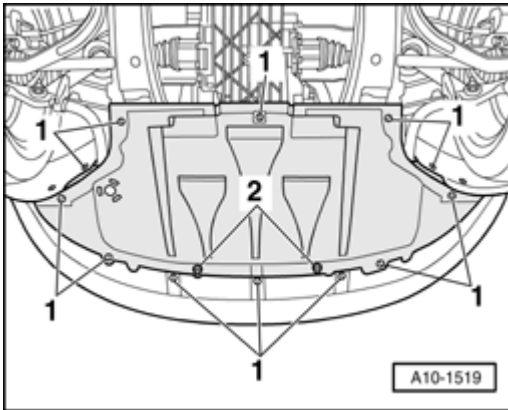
Removing Quick-Release Fasteners, Screws And Noise Insulation
